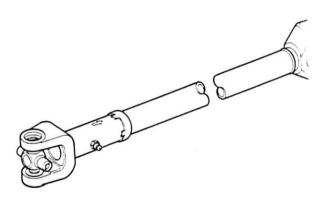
E-2 Front Propeller Shaft Assembly-CJ and Scrambler Models
